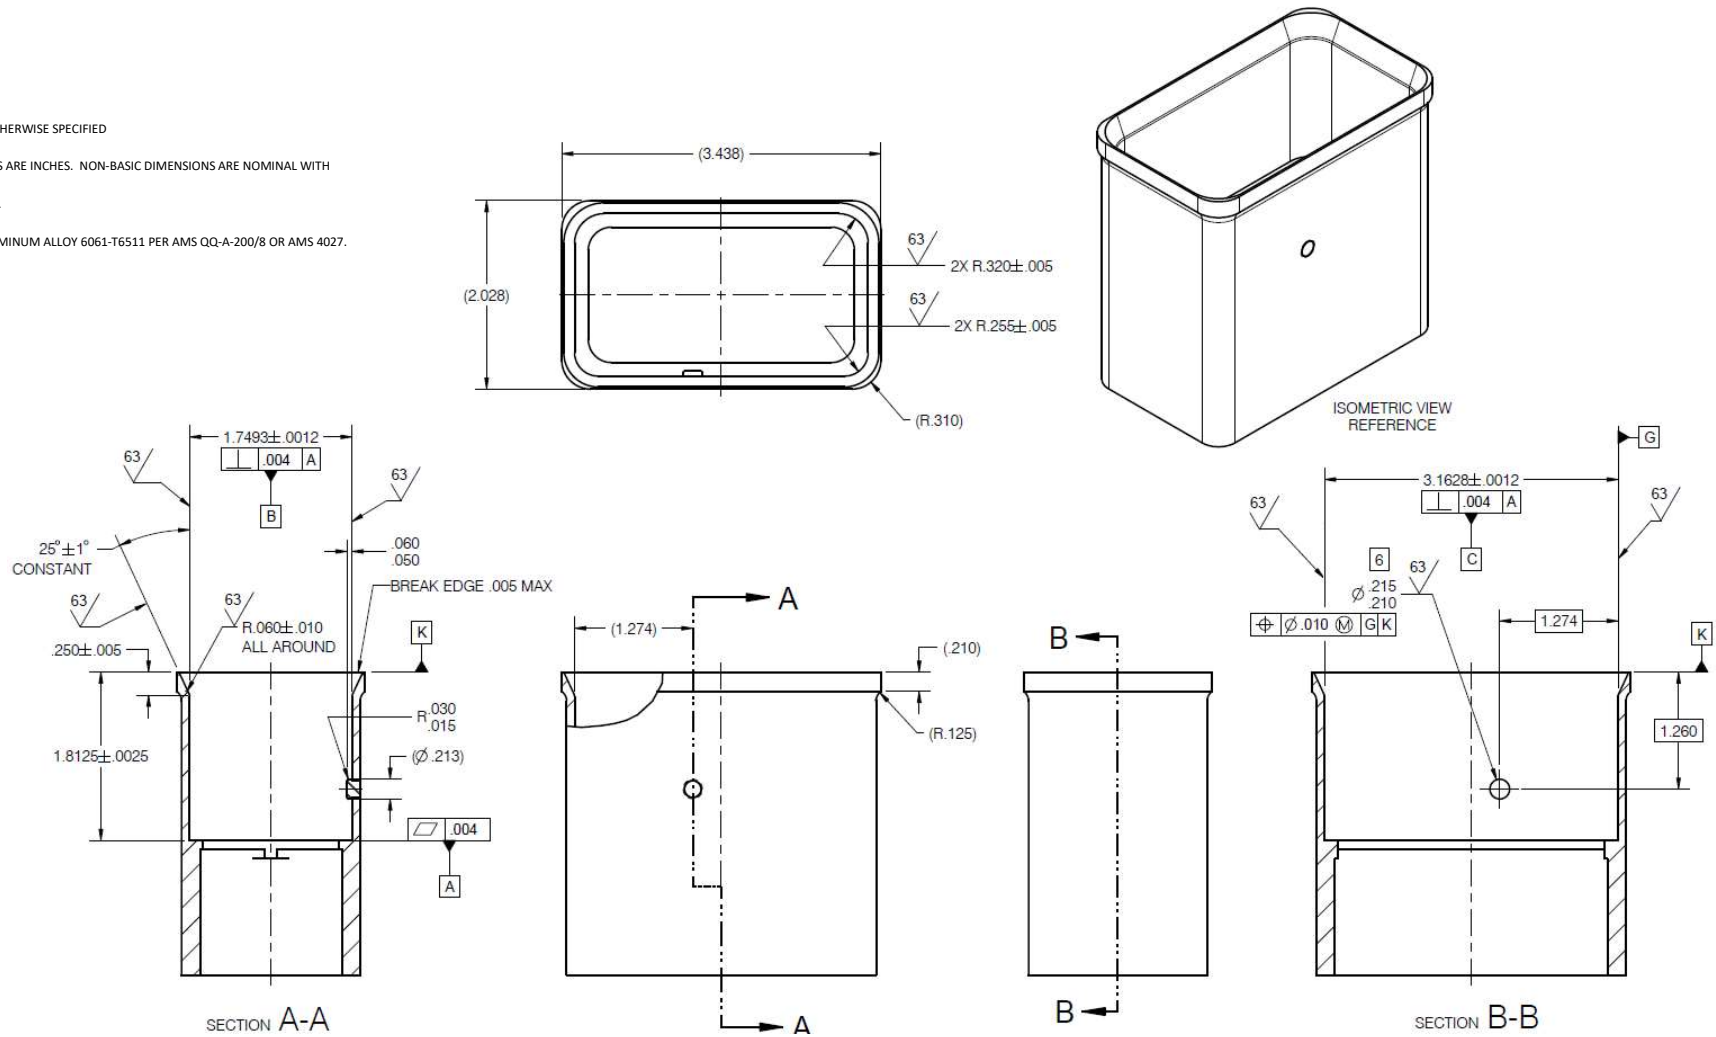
PDTU PLUG DIMENSIONS
